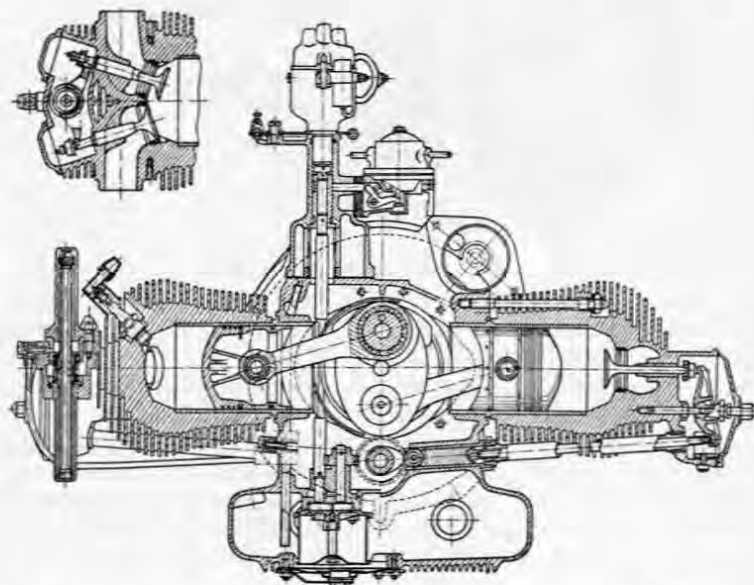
Sectional view of a two-cylinder Panhard-Dyna car engine. Note aluminium cylinder with liner.
